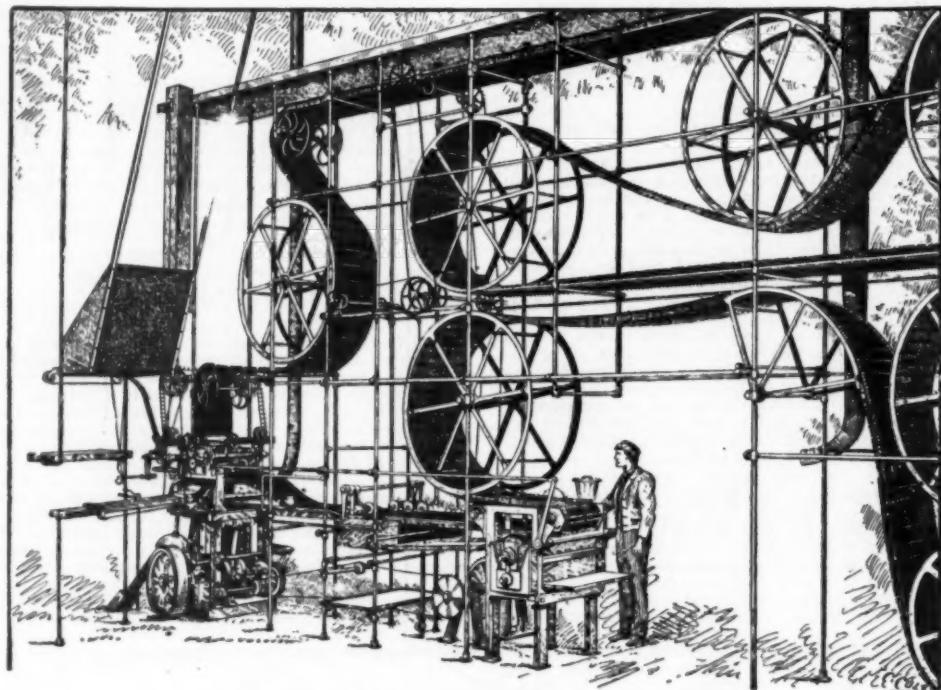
SIDE VIEW OF MATCH-MAKING MACHINE.
